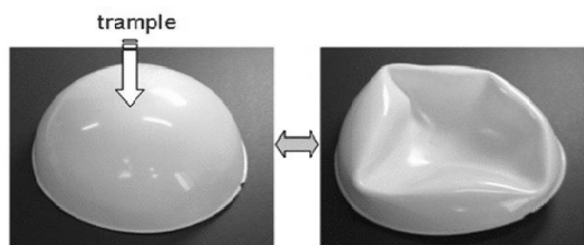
Injection-molded hemispherical body (1 mm thick, 130 mm diameter): as molded (left), trampled (right), and recovered (left)
